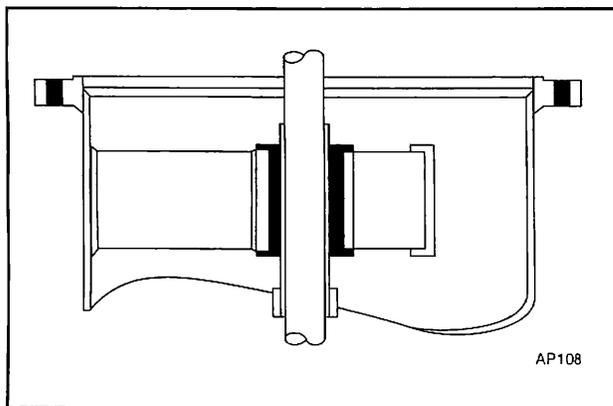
Open Line Shaft Bearing, Welded Configuration
